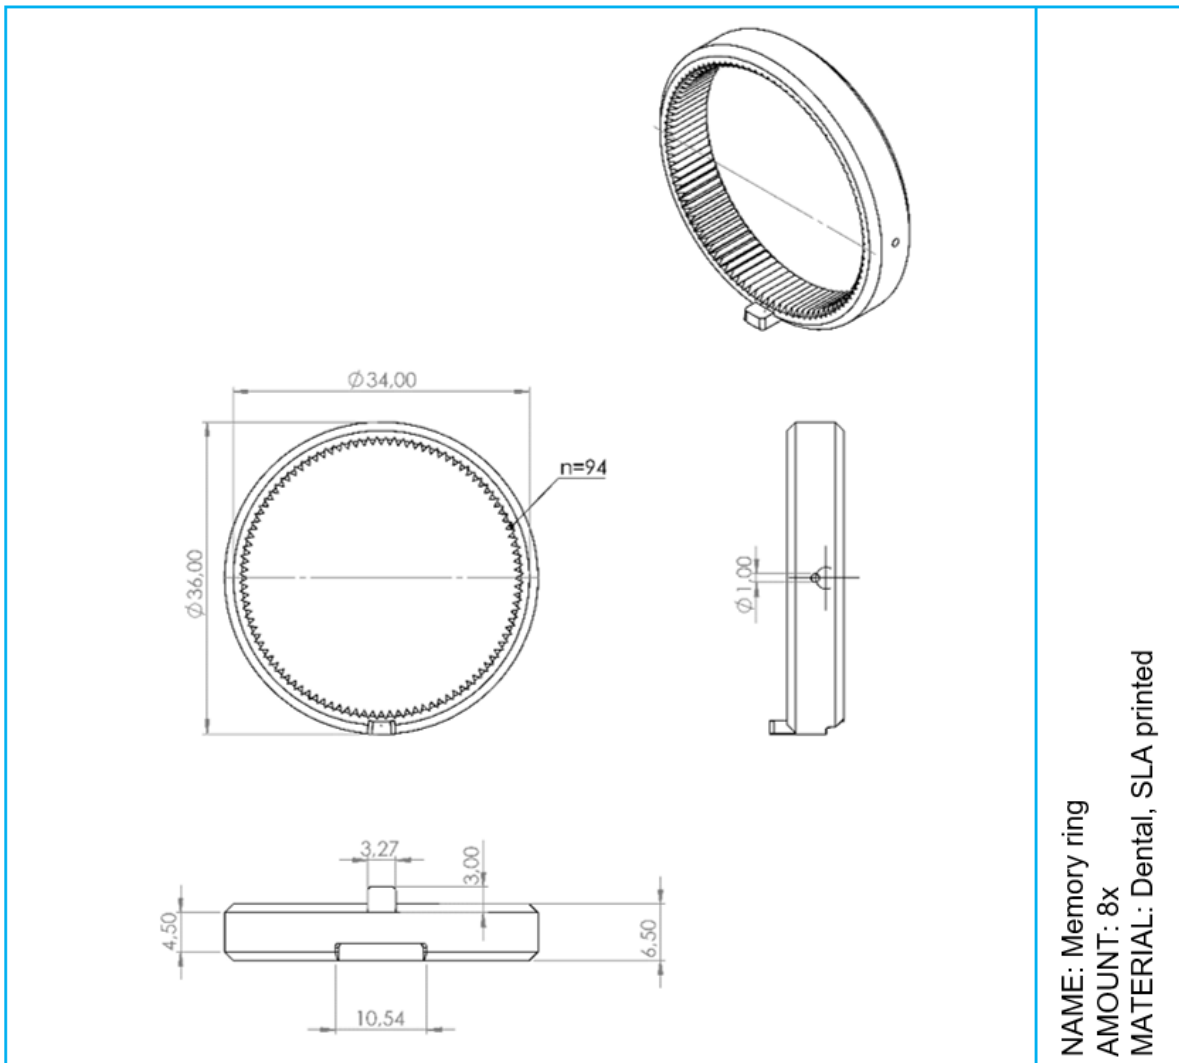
Construction drawings of the memory ring- 3D Printed prototype
